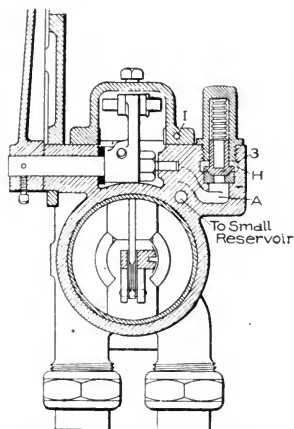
Section through Feed-Valve of New York Engineer's Brake-Valve, as Seen from Rear.
